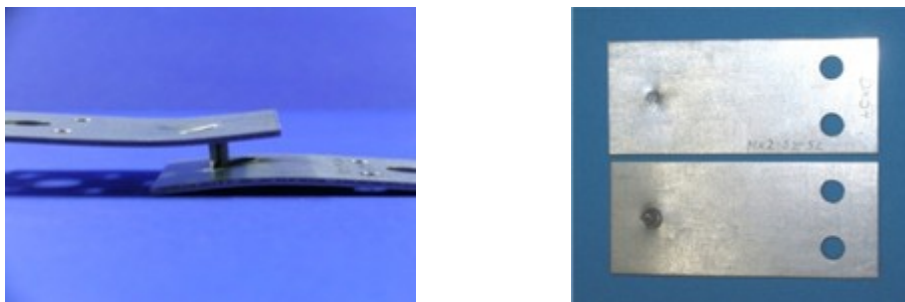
pull-out fracture (left) and interfacial fracture (right) of spot welds [1]
